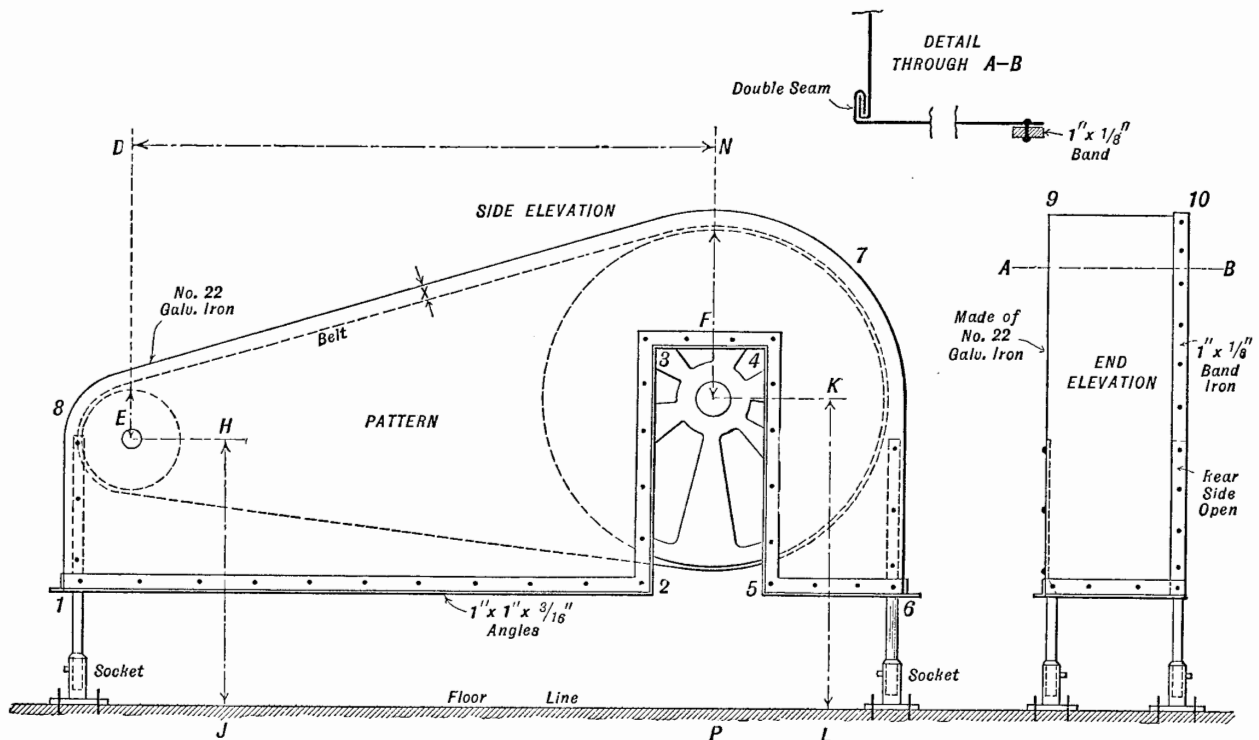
Details of Construction of a Reinforced Sheet Metal Belt Guard
